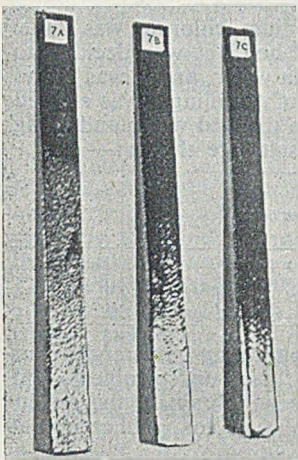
Wedge Test Castings, 12 by 1½ in., tapering from 1½ in. to ½ in. after Black Enamelling. For the Facing Sands, (A) Sulphur, (B) Soot, and (C) Carbon. 5 p.c. additions were made.
